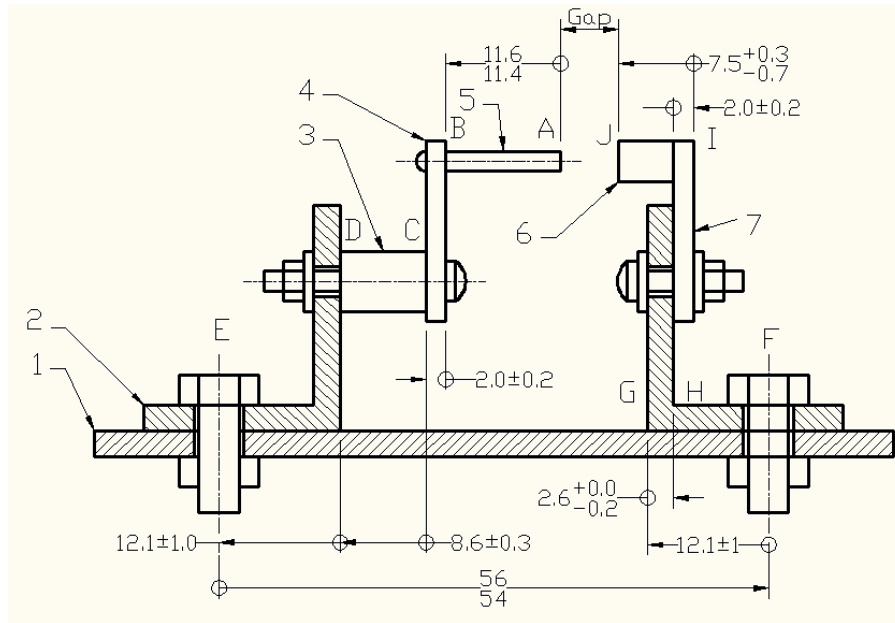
Tolerance stack-up sketch for a complex assembly [14].
